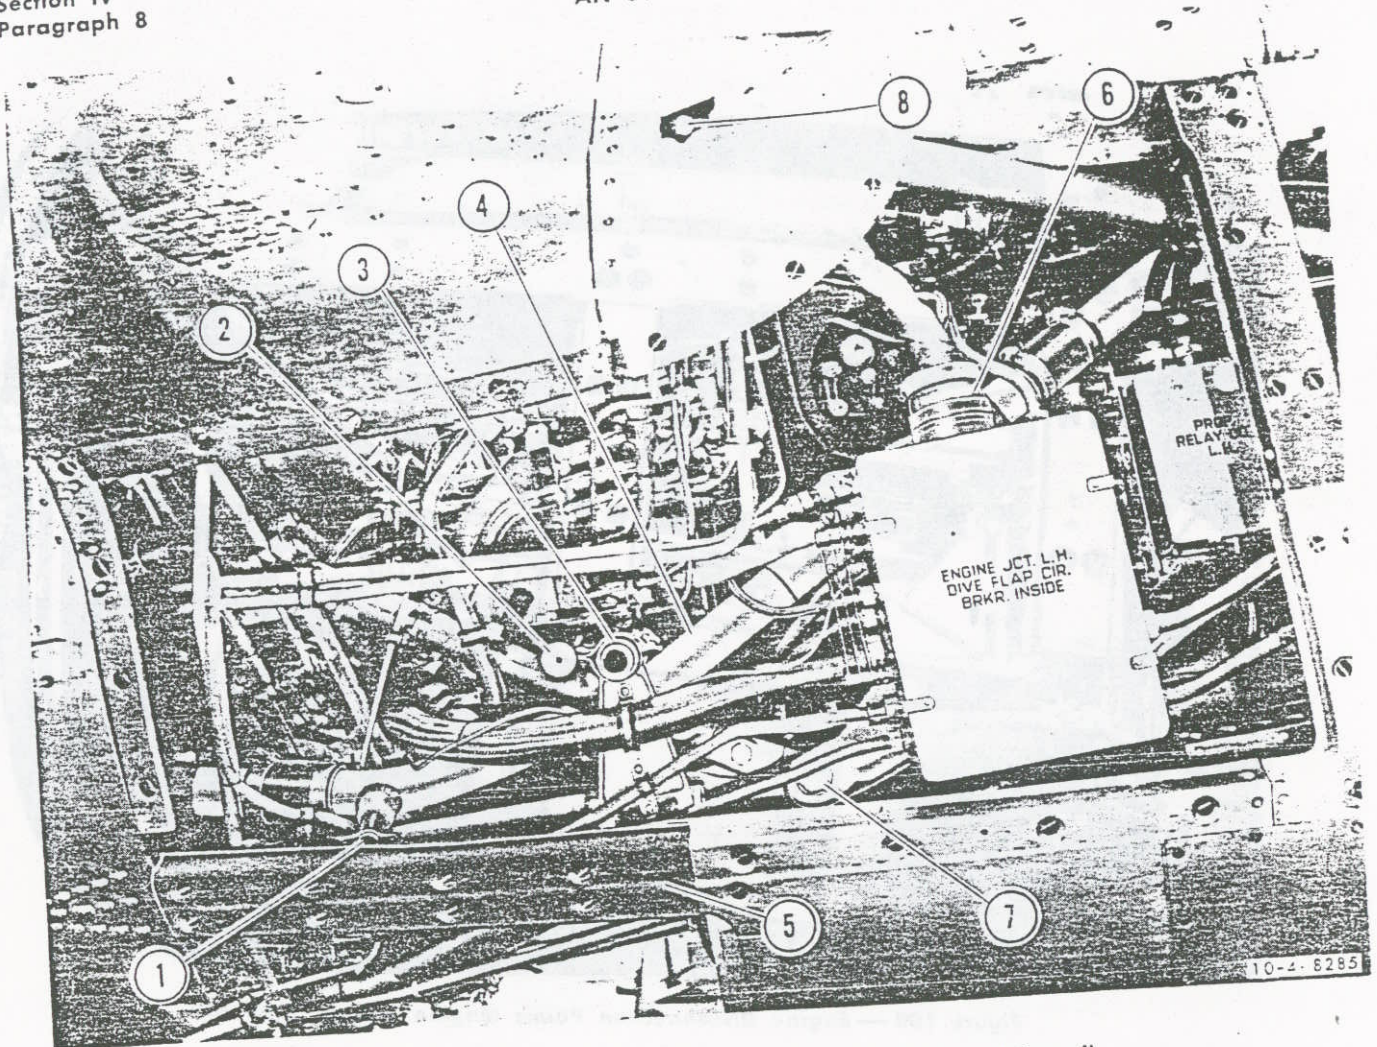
Engine Disconnection Points (Bay Section, Inboard)
